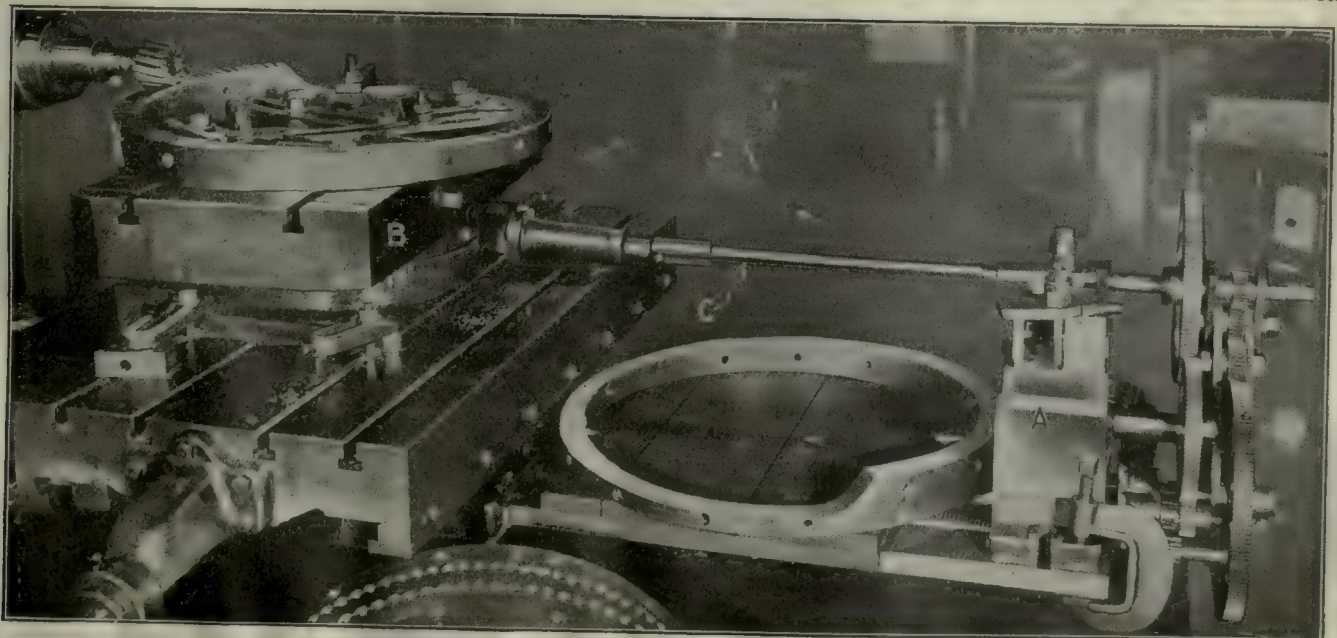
DETAILS OF THE SET-UP AND GEARING
